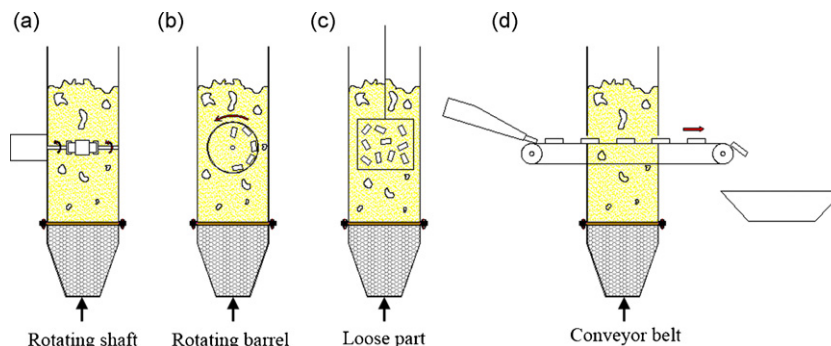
Technological solutions to hold workpieces within a tank of fluidized abrasives during processing: (a) rotating shaft, (b) loose parts inside the fluidization chamber, (c) rotating barrel, and (d) conveyor belt.
